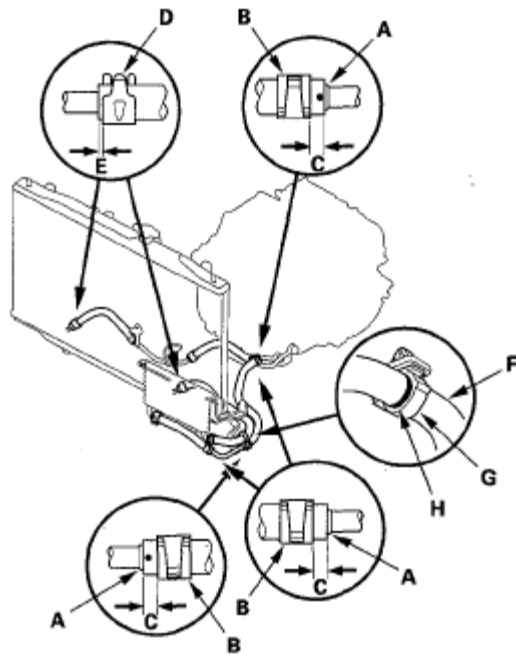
Identifying Gap Between Hose Clip And Hose End
